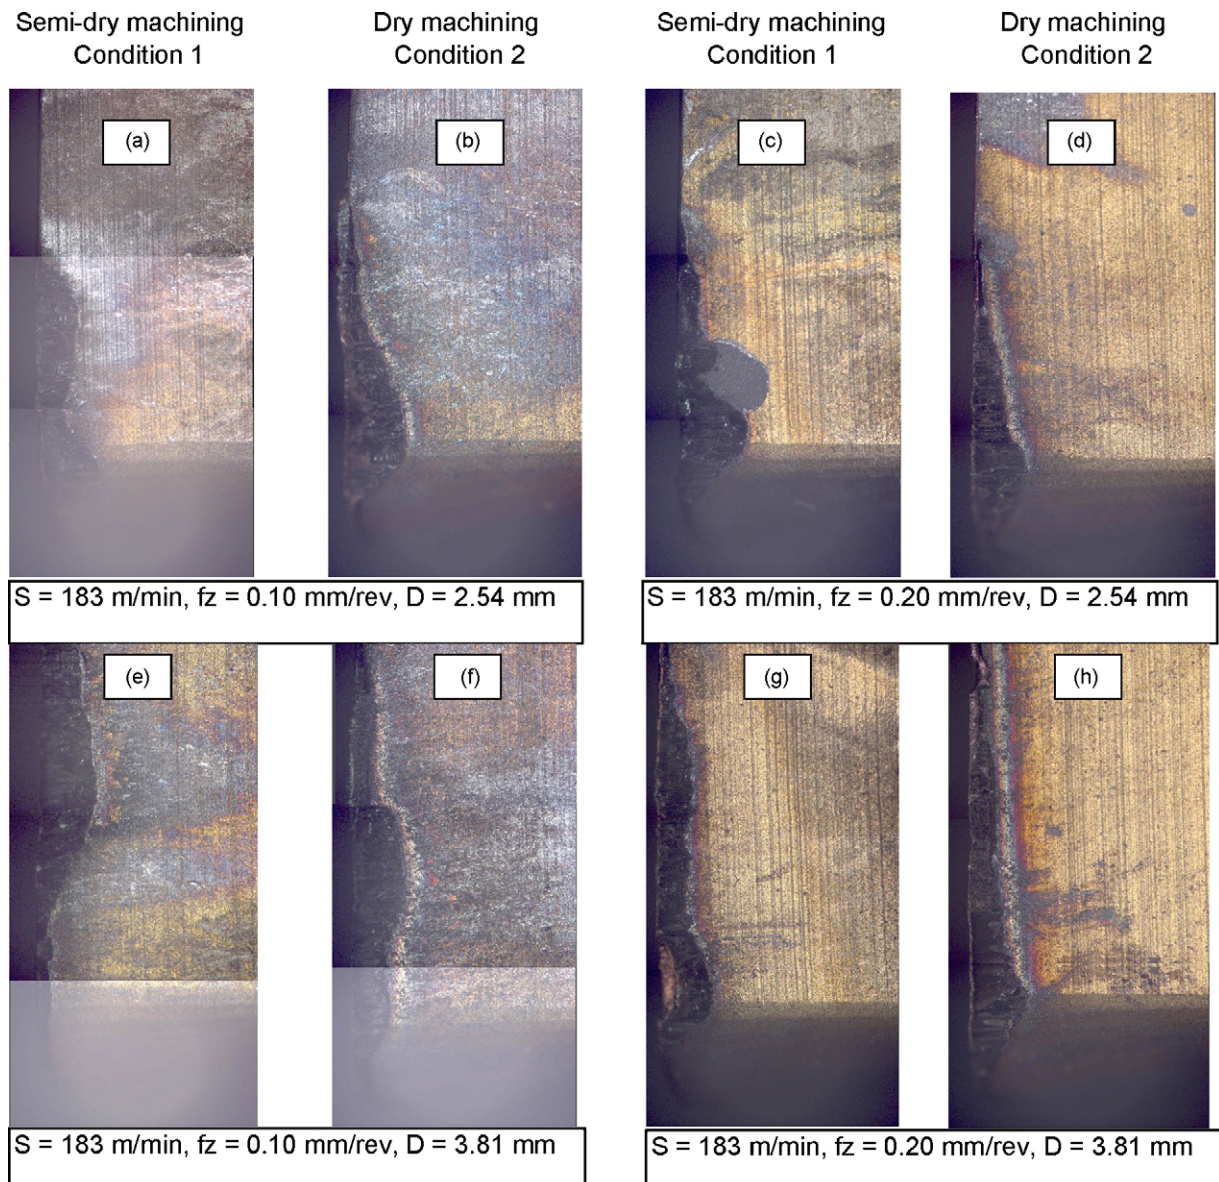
Worn out flank face of PVD TiAlN–TiN multi-layer coated carbide tools after the insert reached its flank wear criterion of 0.40 mm (400 μm).
